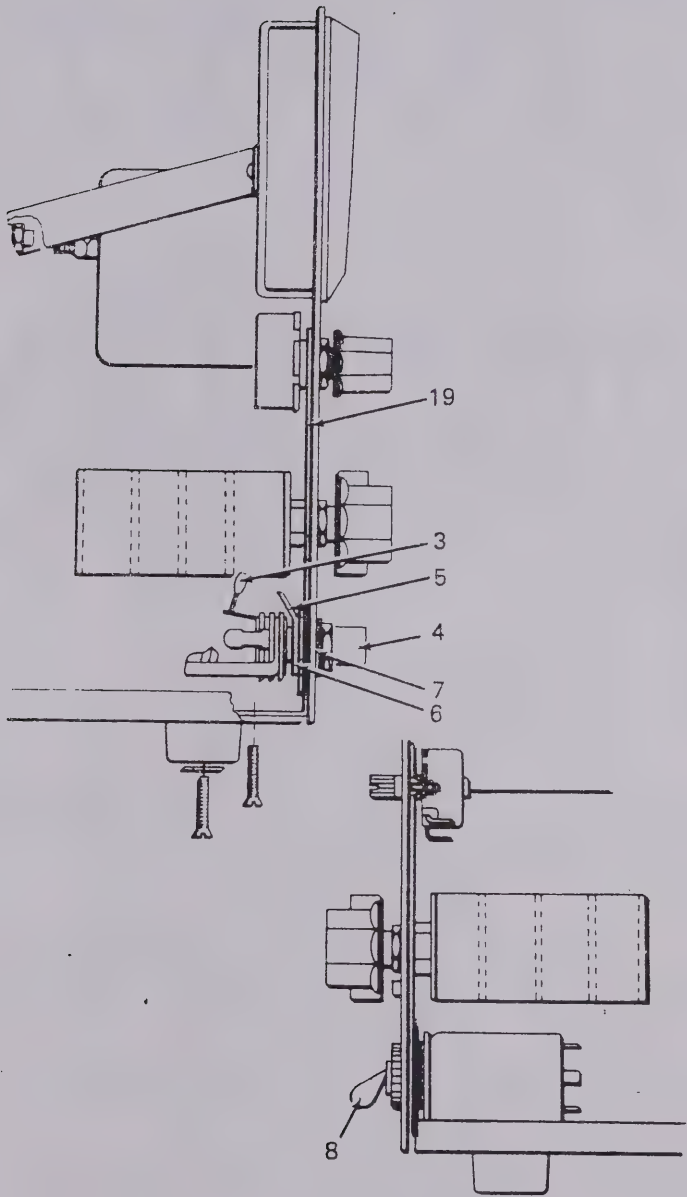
Front Panel Assembly (Page 2 of 2)
